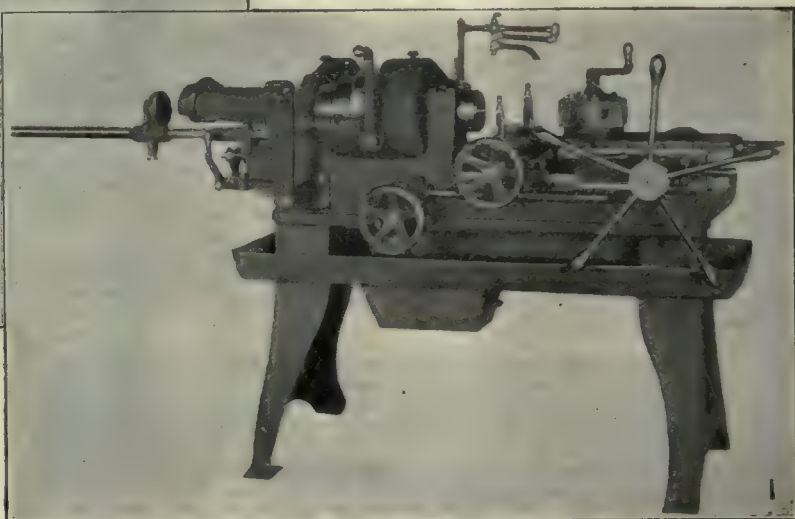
REAR VIEW OF MILLHOLLAND NO. 2 SCREW MACHINE
